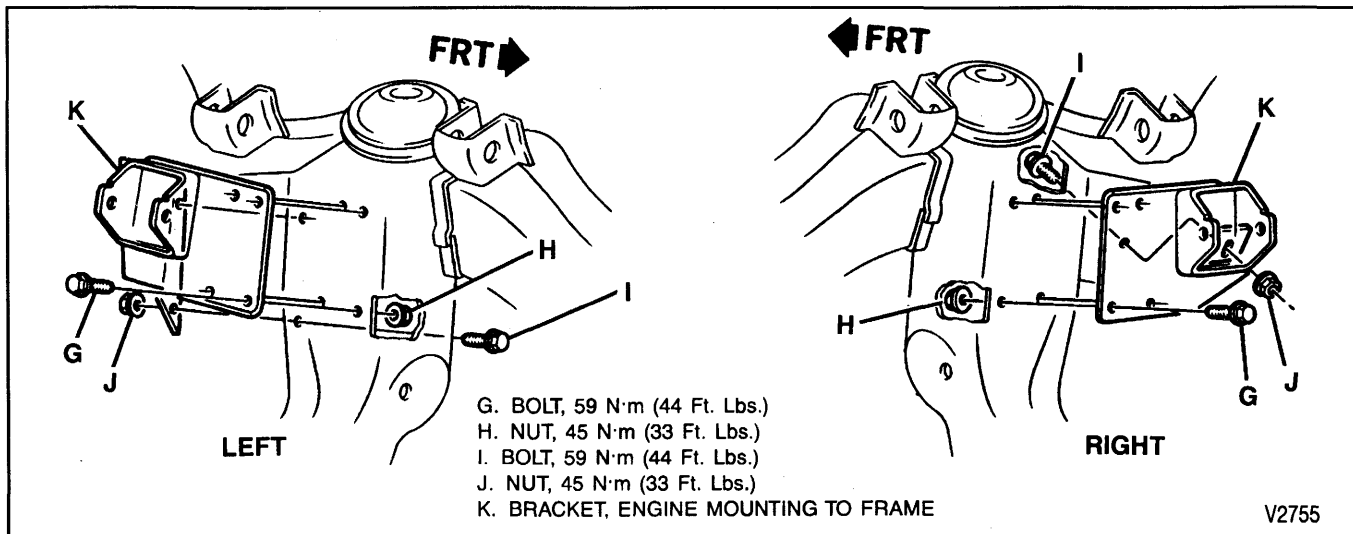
Front Engine Mounting Brackets to Frame (C1 and 2)
